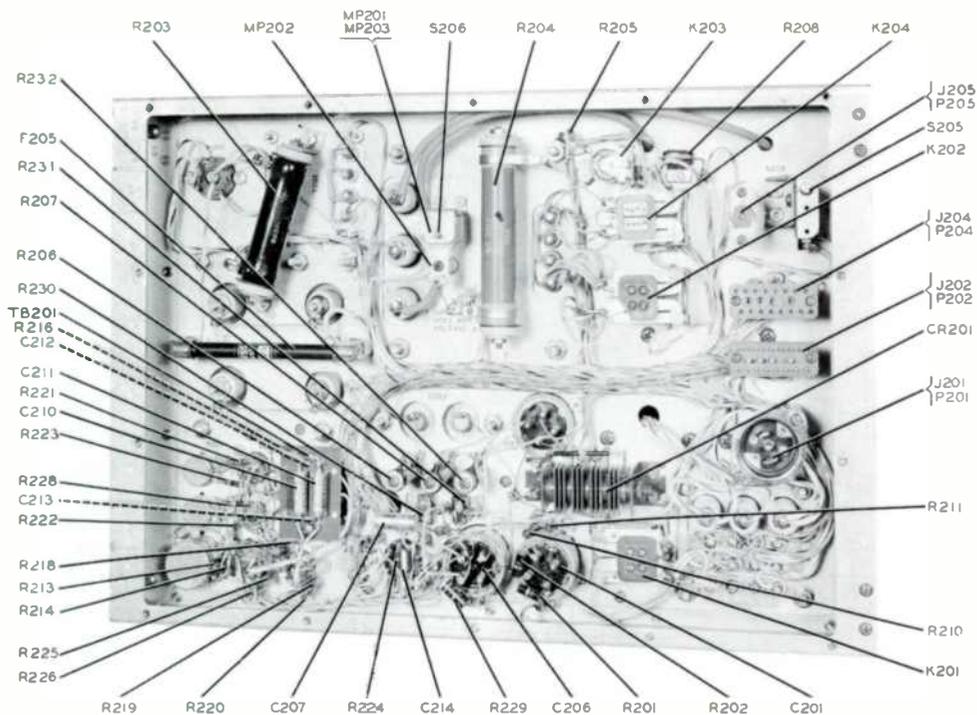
Modulator-Power Supply, Rear View, Dust Cover Removed
